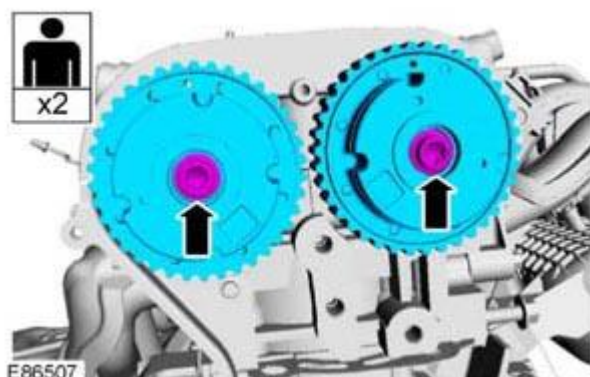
Locating Bolts And Camshaft Phaser And Sprockets
